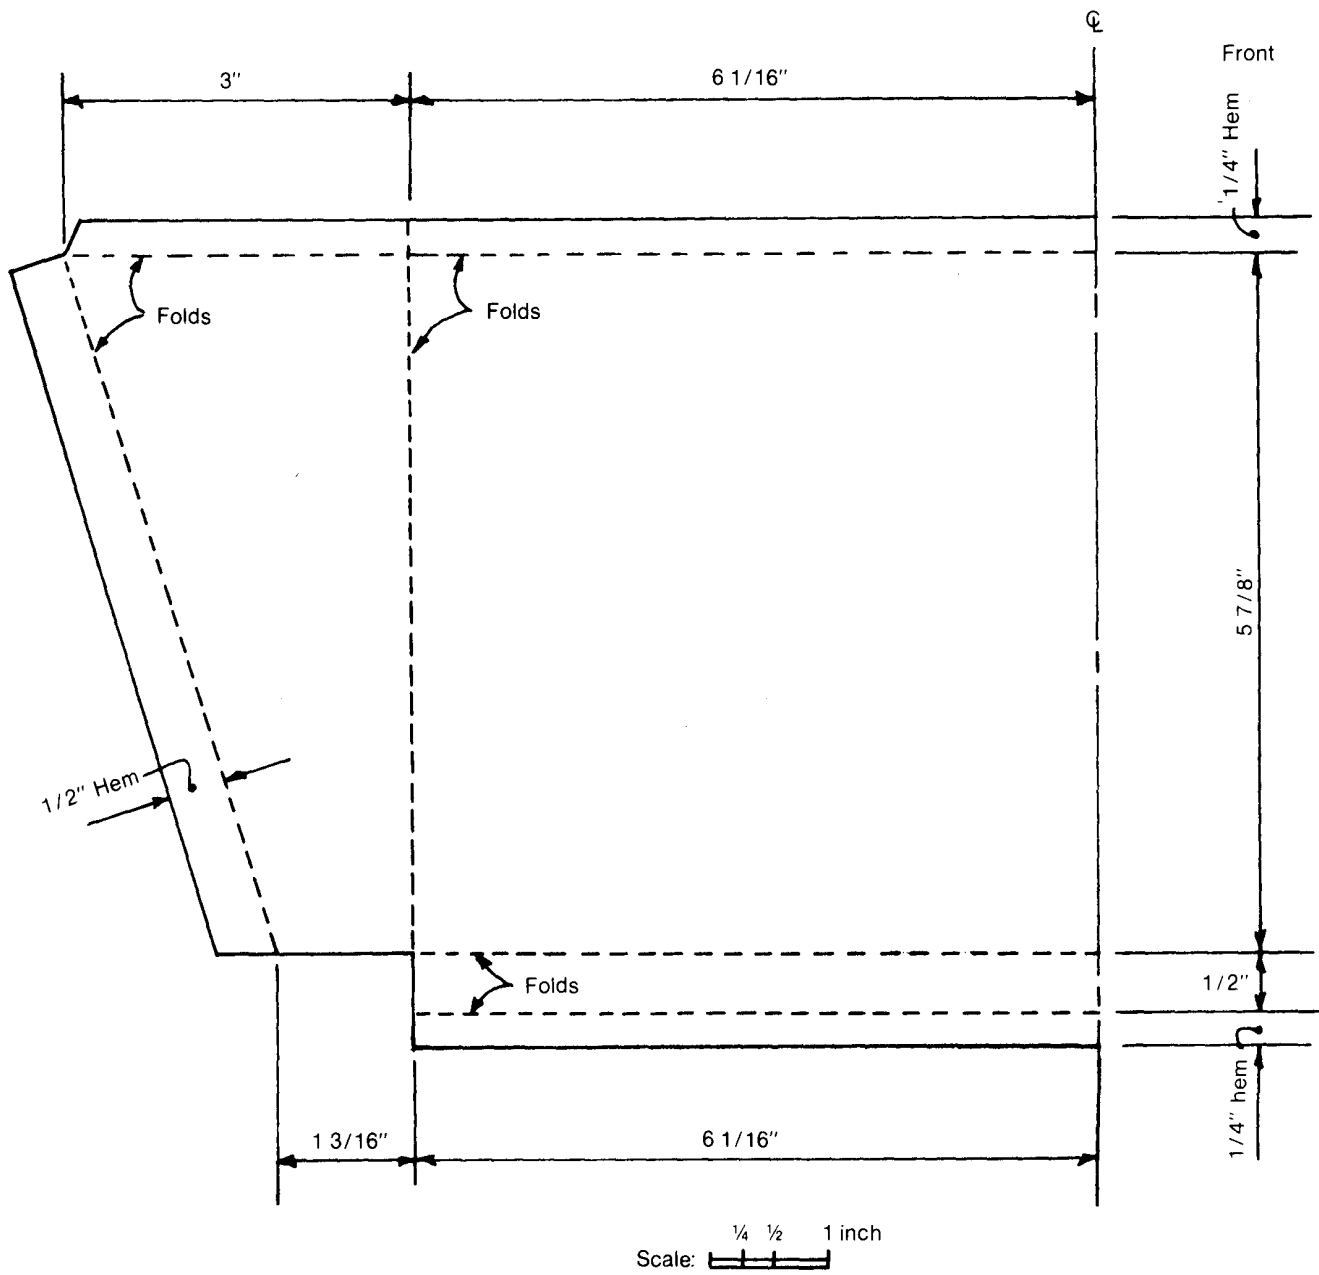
Half template for cutting the 16-gauge sheet metal for the front and sides of the gritter.
